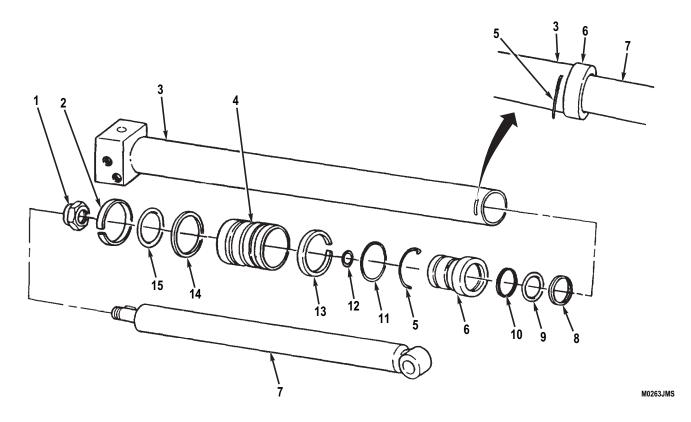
Hydraulic Positioning Cylinder (with Side Lift Kit) Disassembly.
